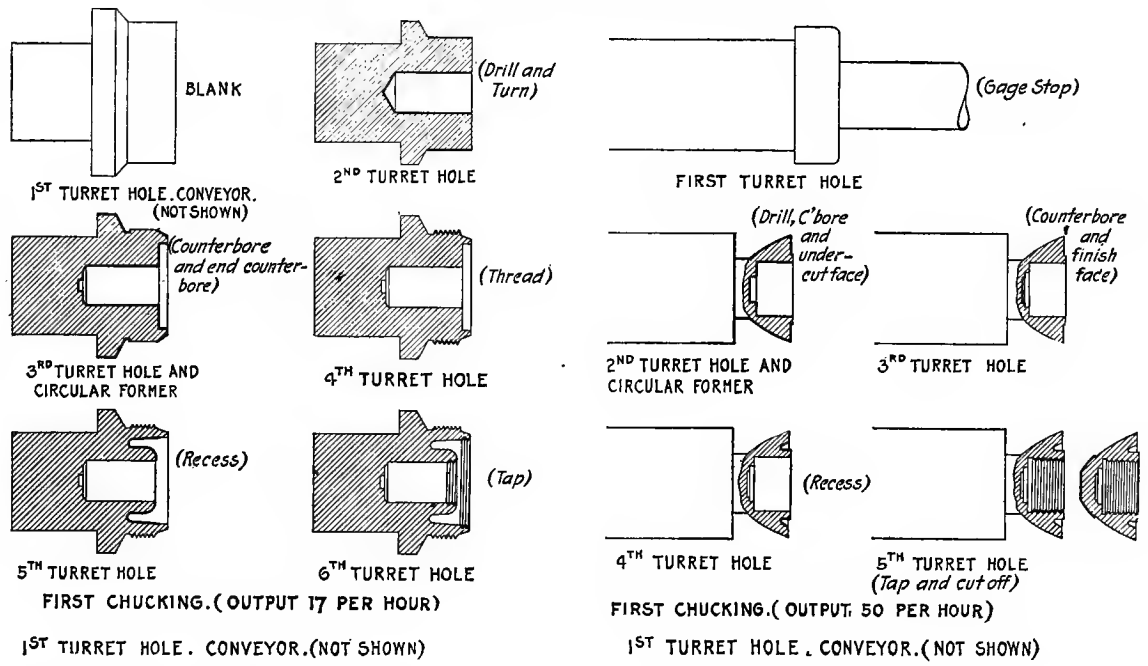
MACHINING A FUSE BODY. (MATERIAL, BRONZE STAMPING OR BRASS CASTING)
